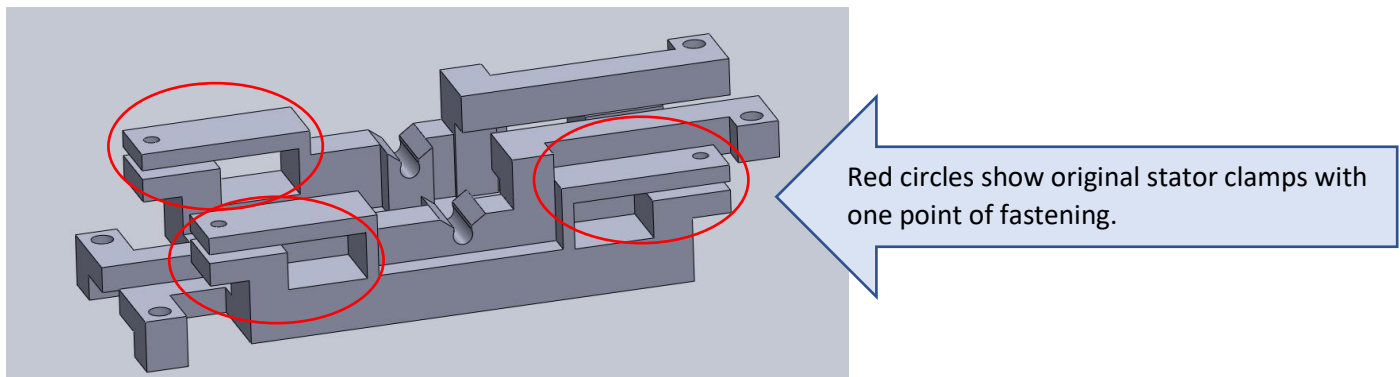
SolidWorks Model of Motor Fixture with Stator Clamp Flanges Circled
